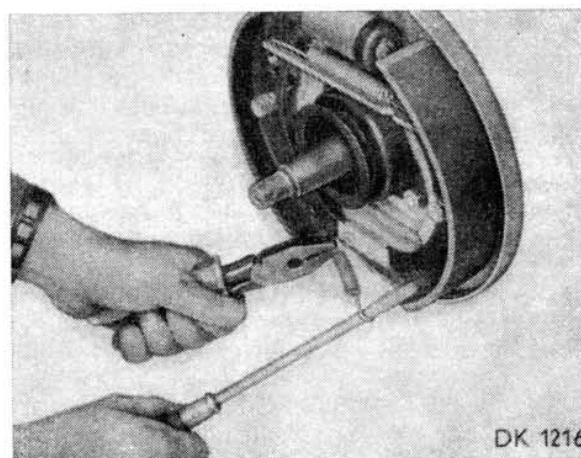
/3 - Stretching Brake Shoe Pull-off Springs
